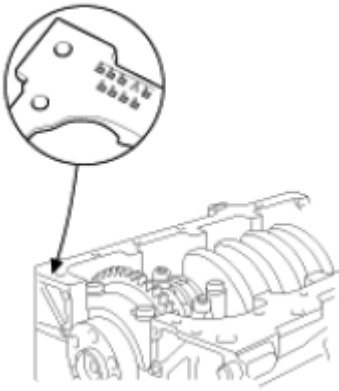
Identifying Cylinder Block Crankshaft Journal Bore Mark Location
